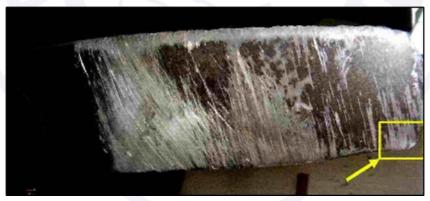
View of a propeller blade showing transverse scratches, impact marks and forward-facing bending.
